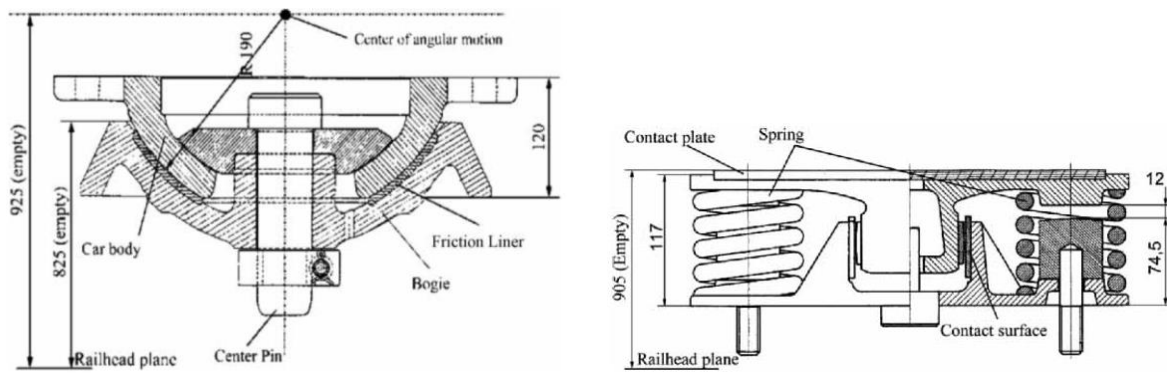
(Left) Centre bowl/pivot dimensions. (Right) Elastic side bearer dimensions and clearances (Allen, Perez, & Hatt, 2008).
